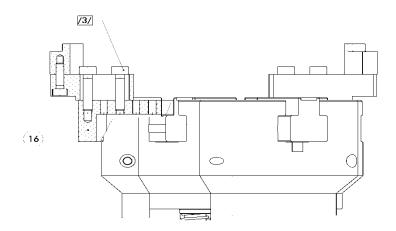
Mounting segment jaws with clamping jaws for external assembly, Dichtungs-Innen-Ø Bereich  $d_1>60$  mm bis ca.  $d_1=150$  mm
